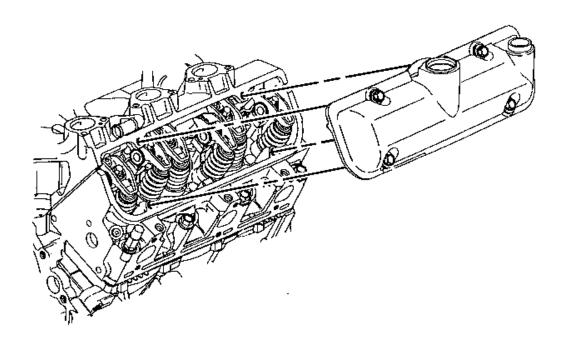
Valve Rocker Arm Cover - Left Courtesy of GENERAL MOTORS CORP.
